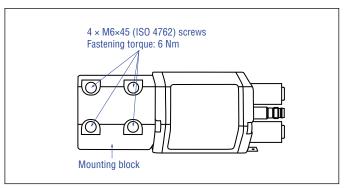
Mounting of RDV sensor electronics housing (example of bottom cable entry)
